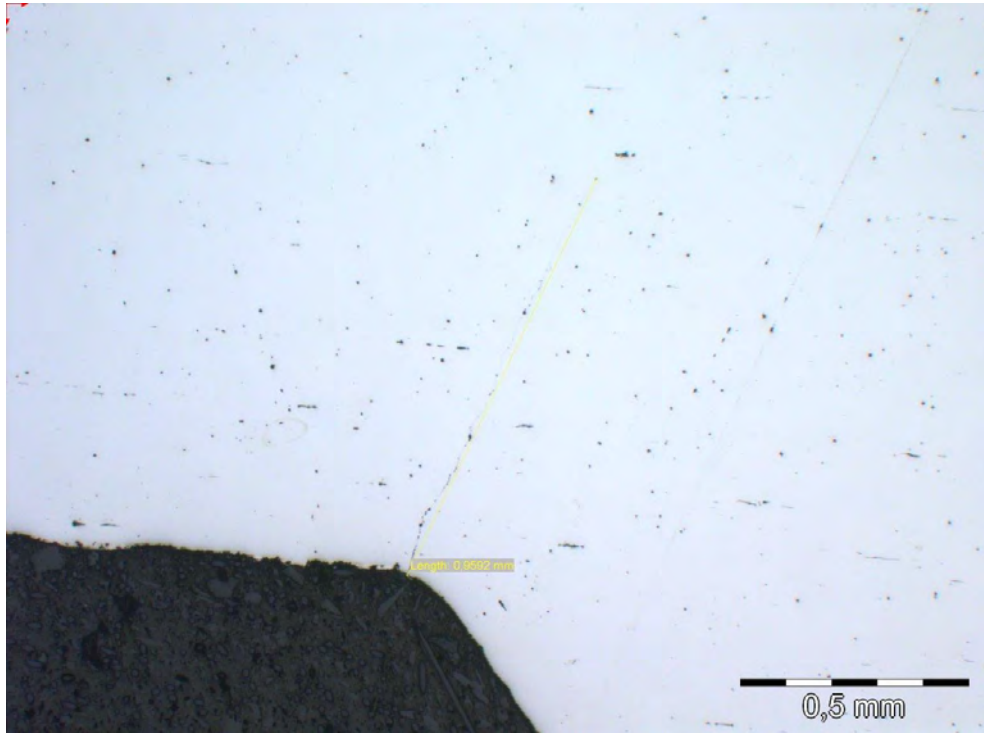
Crack at segment A, first ridge on barrel no. 8832/6713
